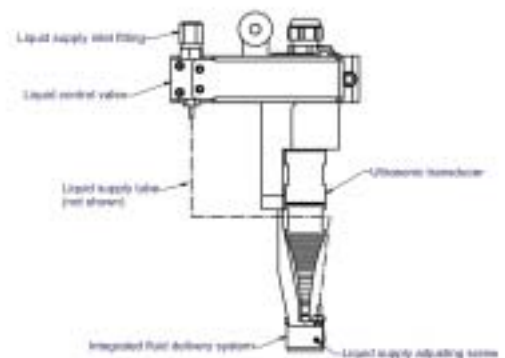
Ultra-Spray – Ultrasonic Spray Head Assembly
